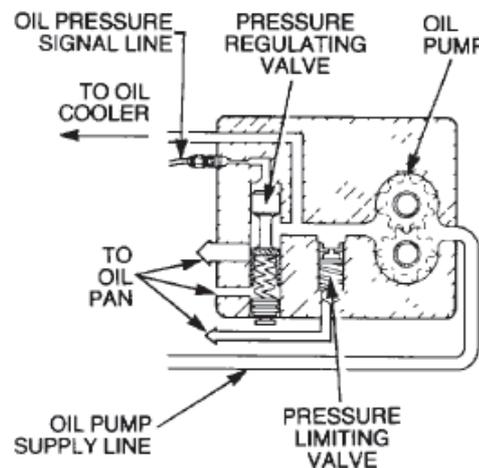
Pressure Regulating Valve and Pressure Limiting Valve Operation
